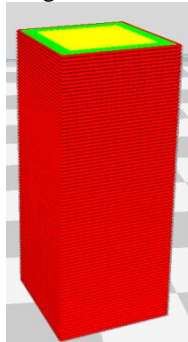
samples of compression test which dimensions (12.7\*12.7\*25.4).
